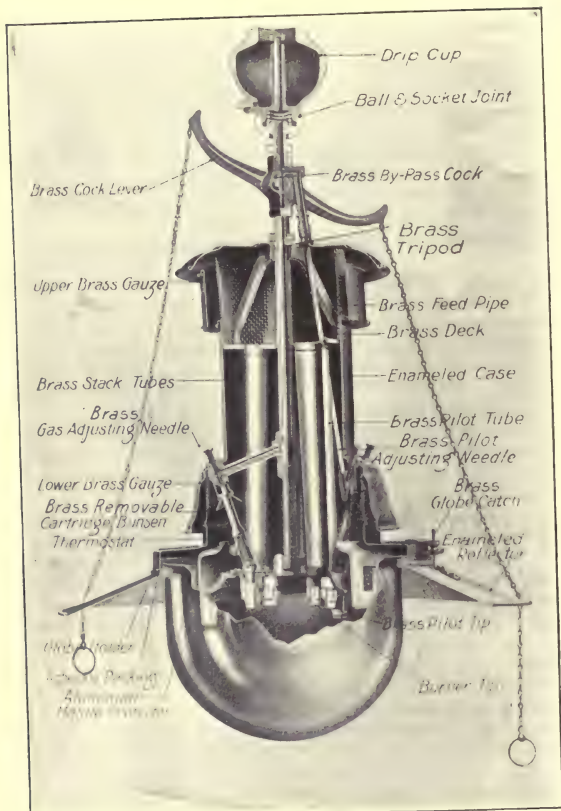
Five-Burner Outdoor Arc Lamp—Vertical Section, page 835.
